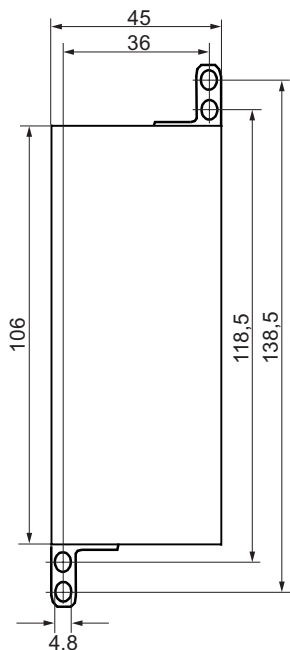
Hole drilling template DP / AS-i F-Link with securing lugs for screw fixings (3RP1903)
